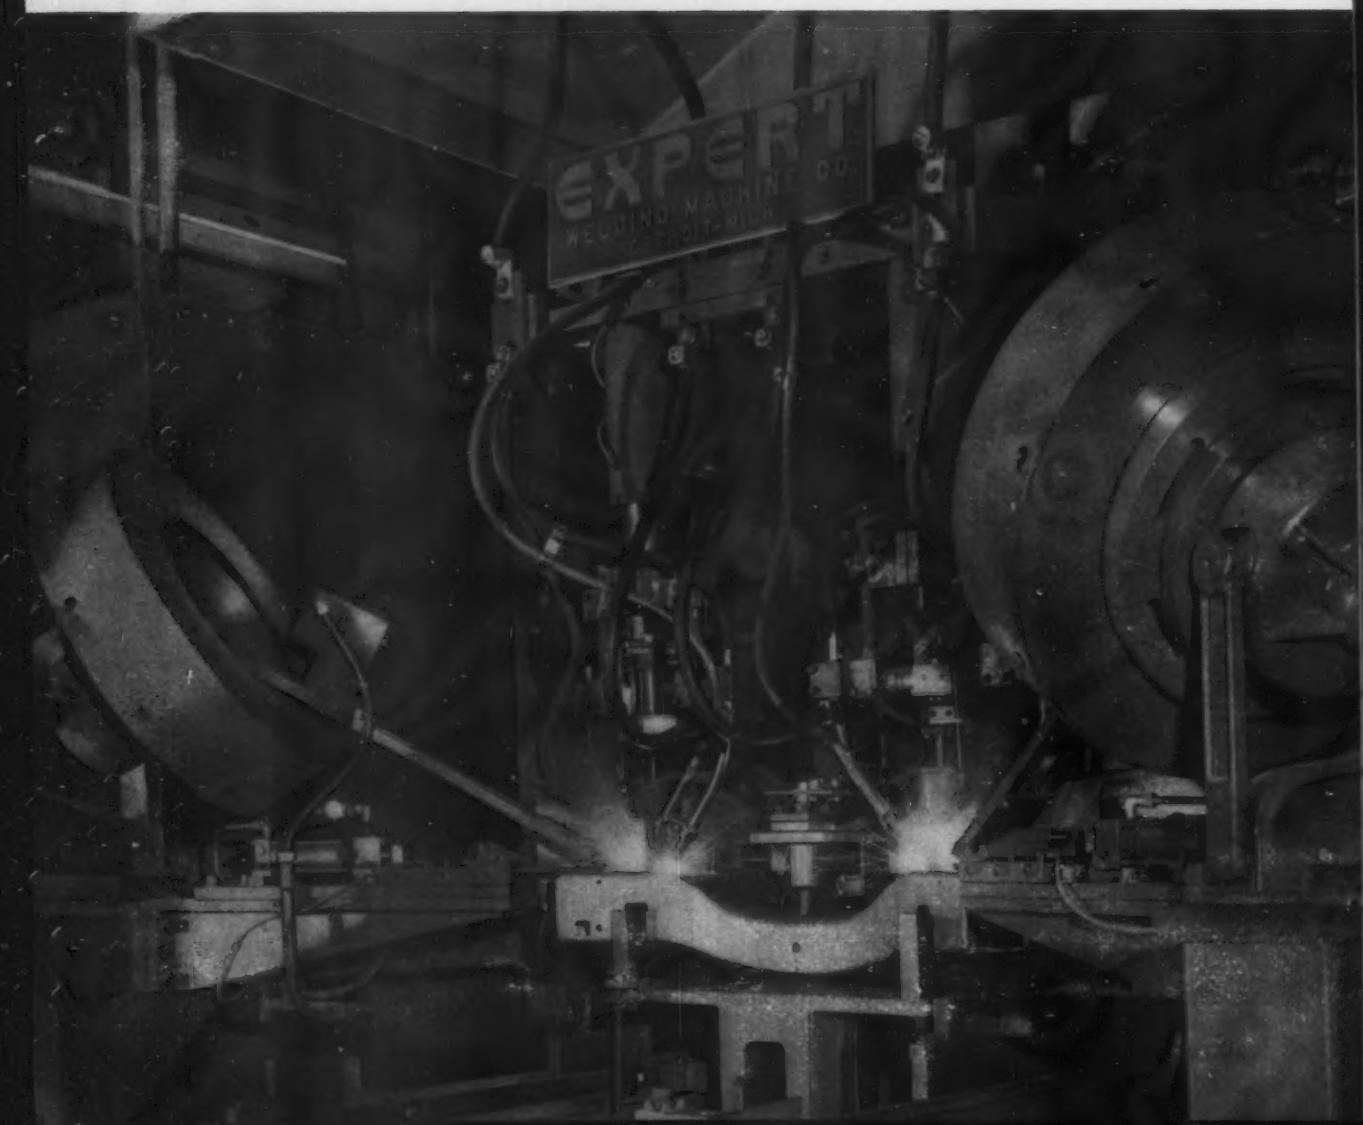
High-clutch housing sub-assemblies are welded by a submerged-arc technique. After a backup bead is laid down, the sub-assembly is inverted for an inside bead.
